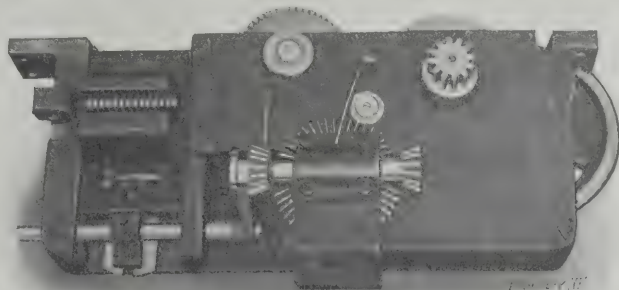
Rear View of Apron of Cincinnati Lathe & Tool Co.'s 16-inch Engine Lathe
